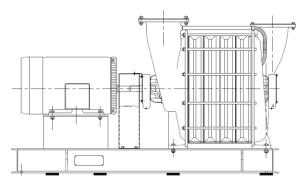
Mounting dampers (black) under the machine – side view (reference only)
